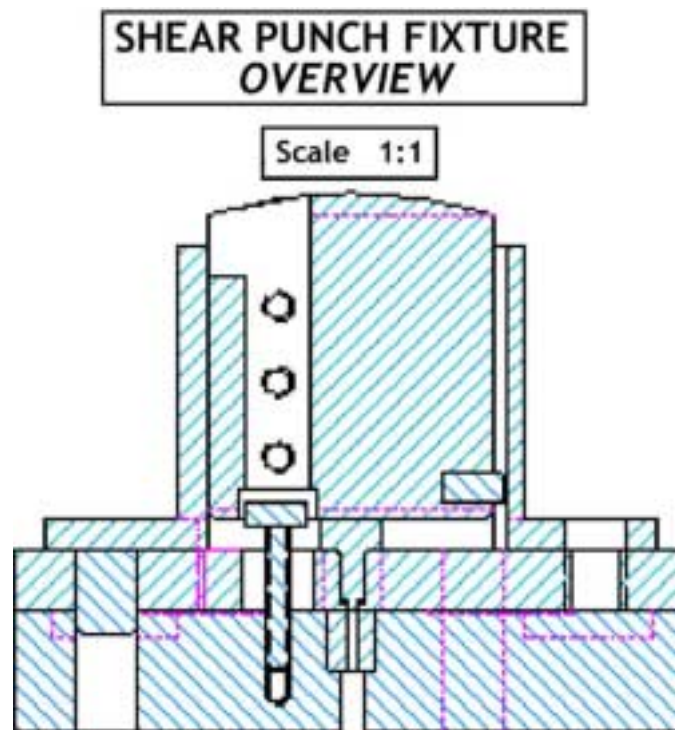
Cross-sectional view of the shear punch design for LANL.
